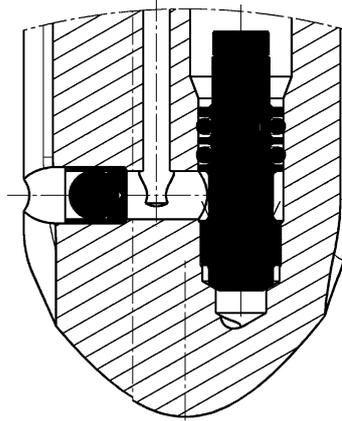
Sectional drawing of spark plug sleeve with installed PCGV
